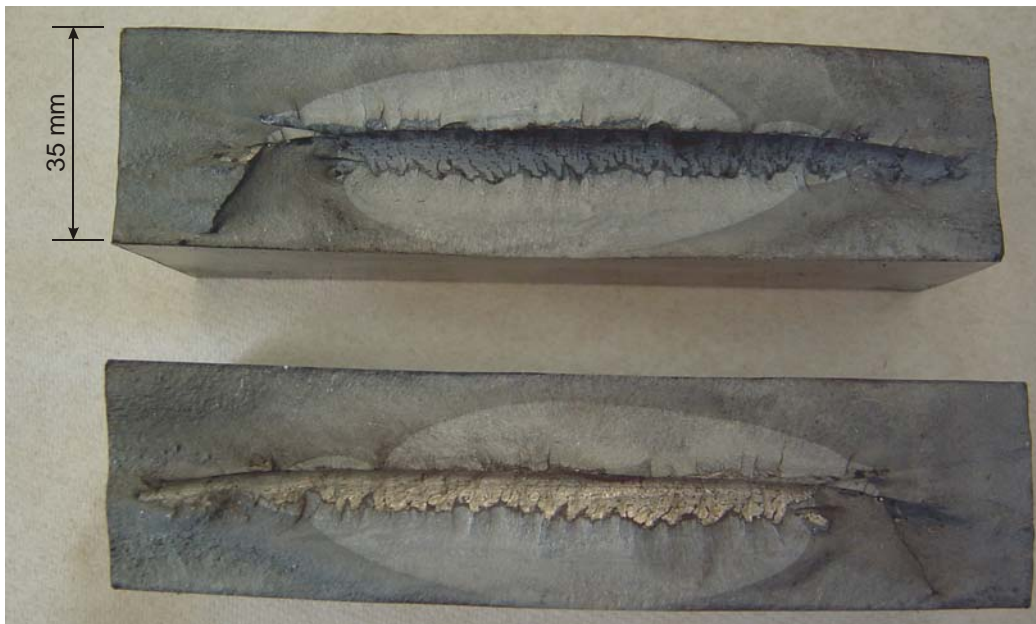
Fracture surfaces of specimen L145NTT.
